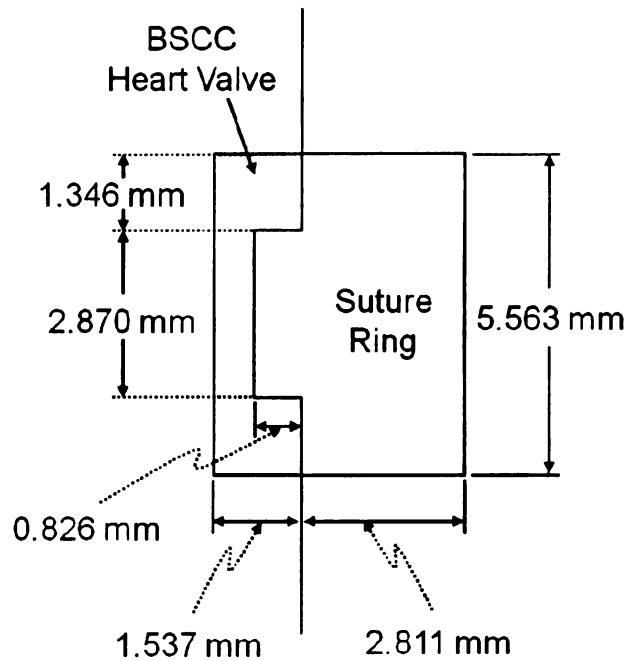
Cross-sectional dimensions of the flange and suture rings used in the finite element model.
